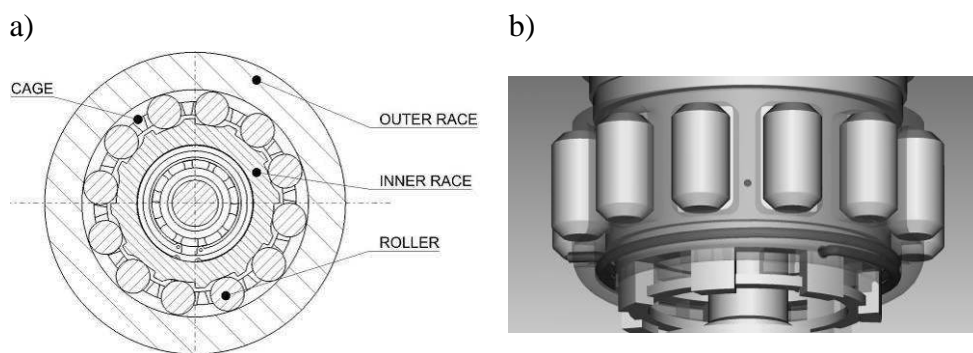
Cross section of roller clutch (a), spring connecting outer race with inner race (b)
